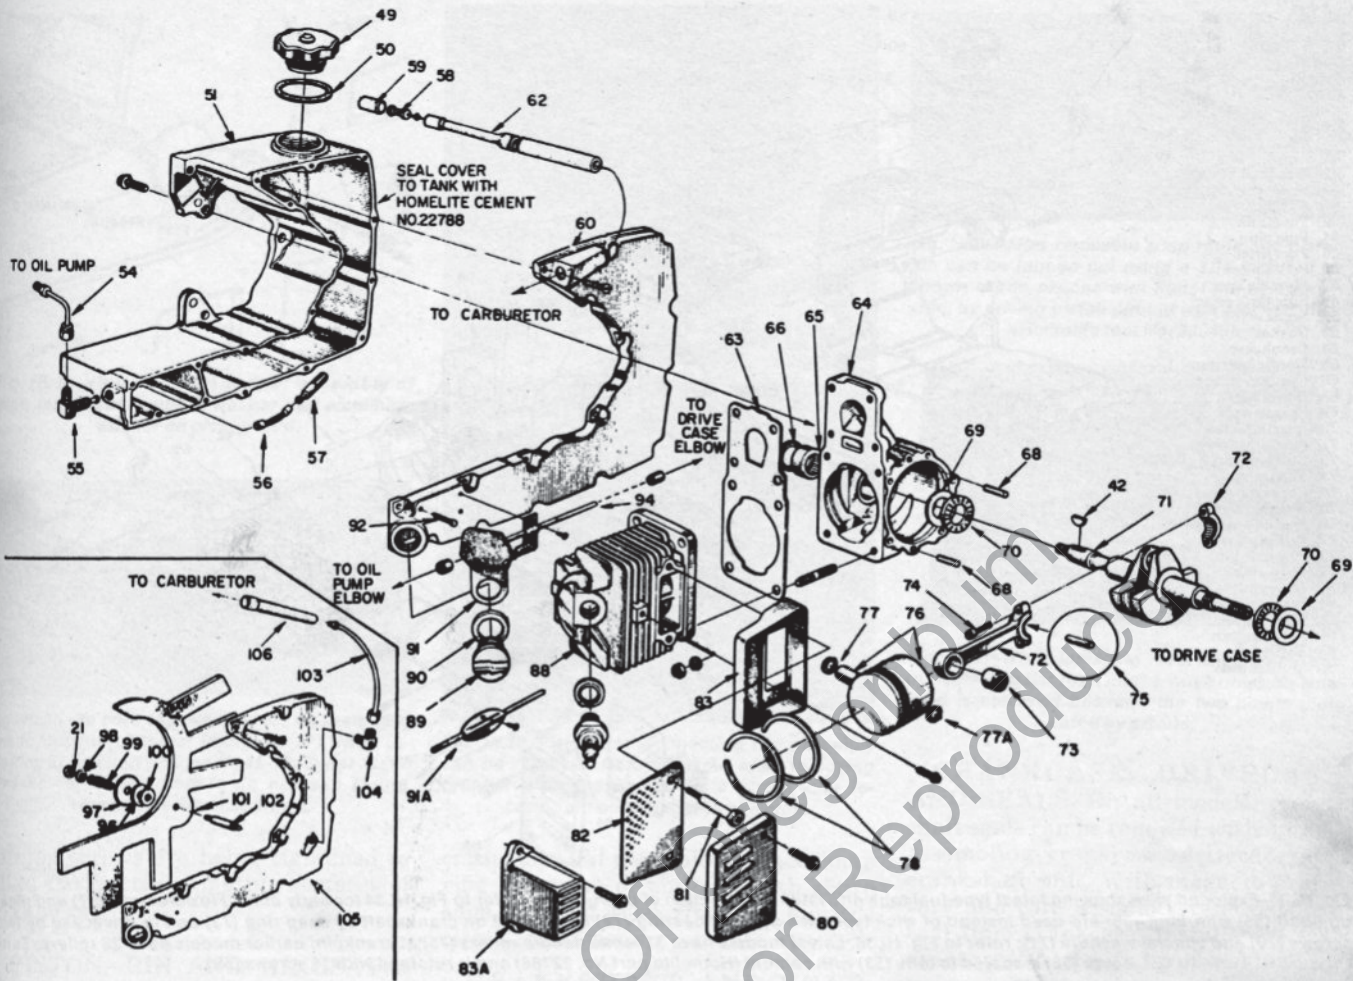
Exploded view showing powerhead and fuel tank construction of models XL-12, Super XL-12 and XL-15, refer to Fig. HL35 for other models. Early wick type fuel pickup and tank cover are shown in inset; beginning with serial No. 2188611, flexible hose (62) type pickup is used. Dowel pins (68) are used on later models; refer to text. Single piece muffler (83A) is used on XL-12 and Super XL-12; XL-15 is fitted with three piece muffler (80, 82 & 83).
